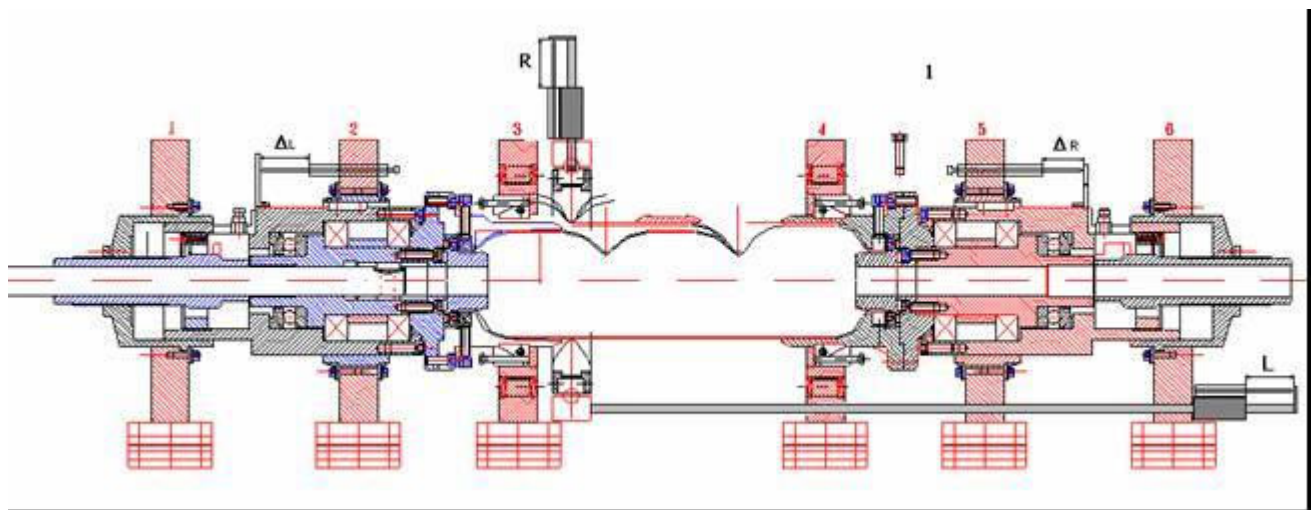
Schematic of the tube necking machine (cross section)
